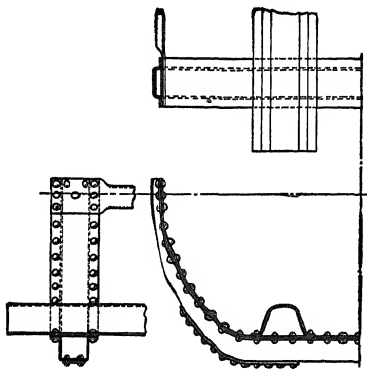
Car with frame consisting of two pressed steel hoods and box-shaped arms.]
